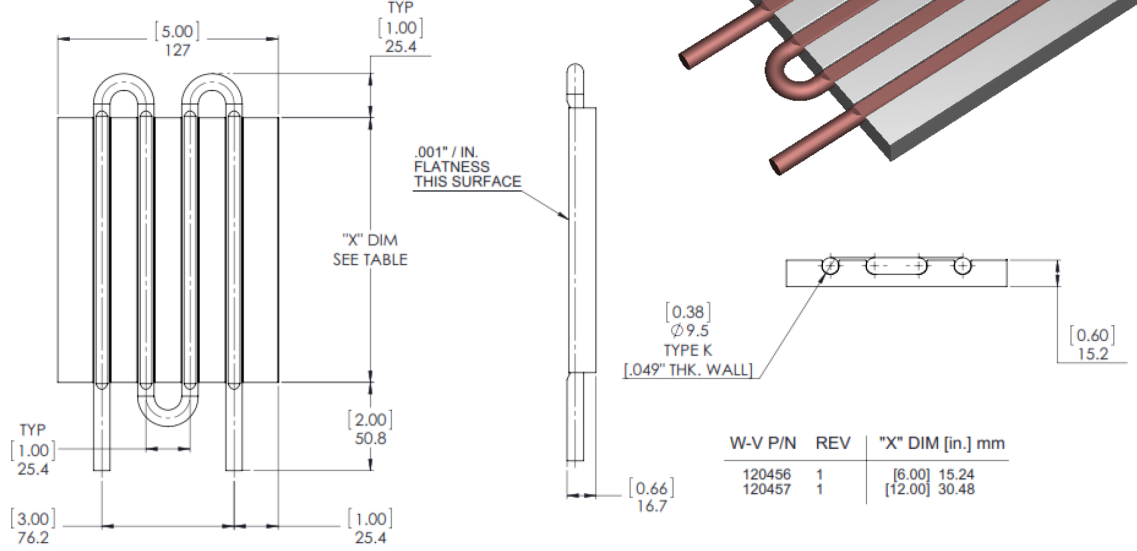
Drawing of the cold plates used for the 5×5 prototype
